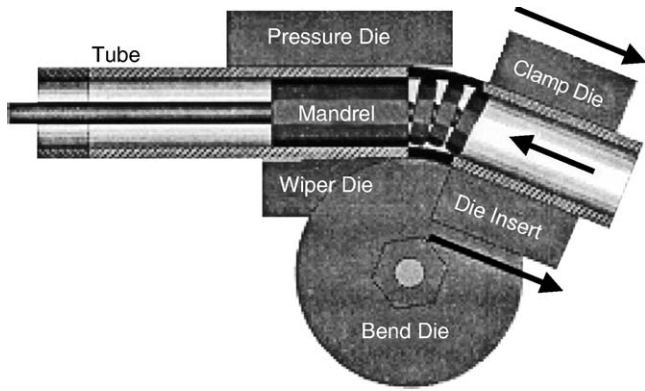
Schematic of rotary draw bender (Eagle Precision Technologies Inc.).
